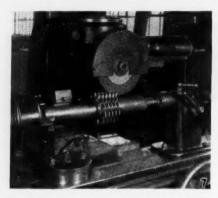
Grinding a hob. Each job is carefully inspected after grinding for gash angle, rake, radius, out-of-round, and grinding checks.
